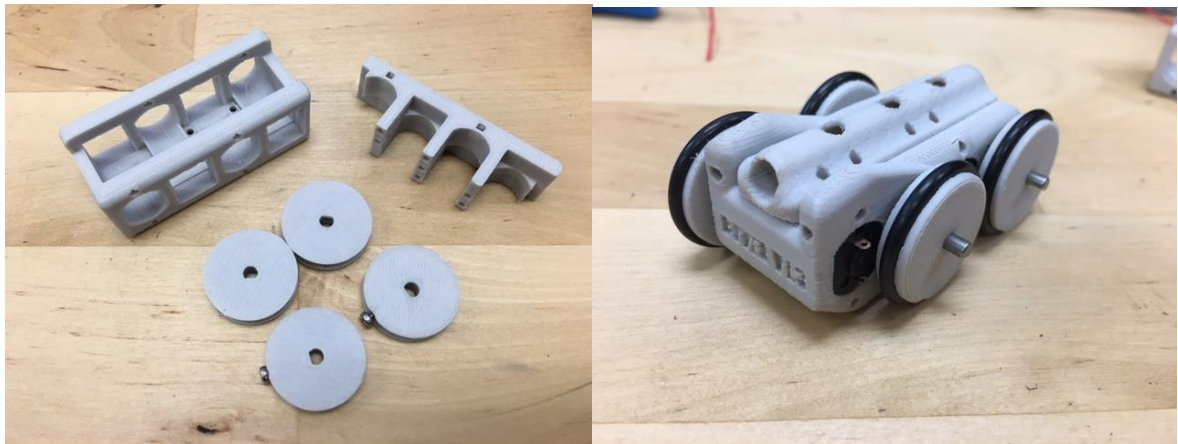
3D printed components (left), assembled inspection tool (right).
